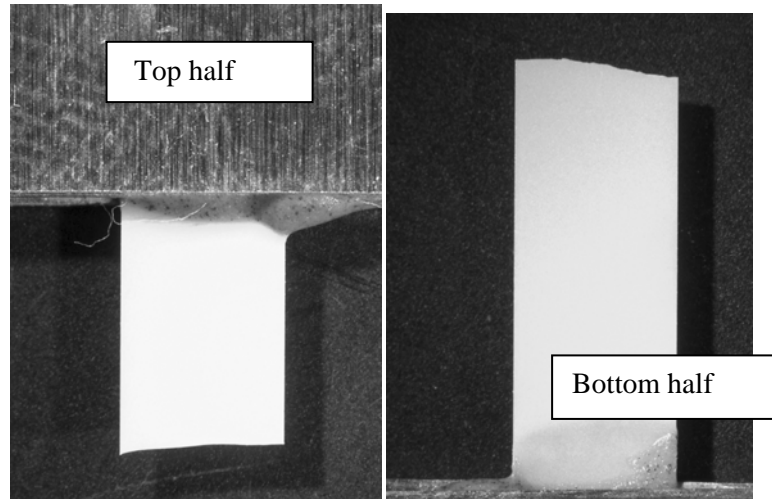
Optical macrograph of a tested Ceraflex tensile test specimen at the end of the test showing the fractured tensile gage section: (a) top half and (b) bottom half
